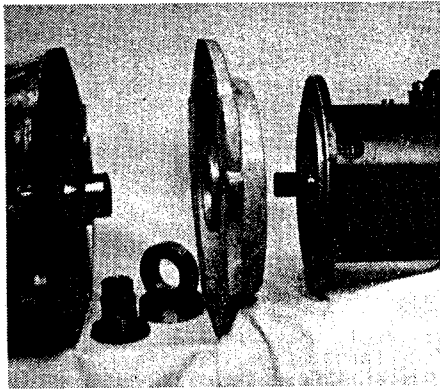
One adapter face fits the flywheel housing. The other fits the motor.
